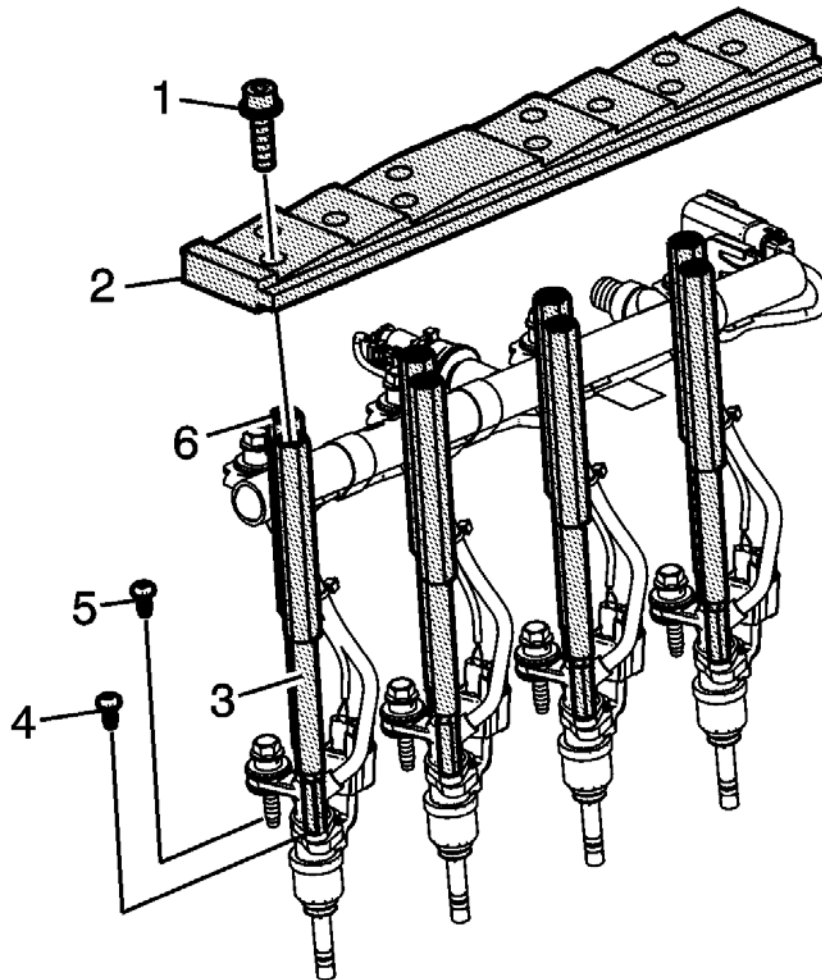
Installing Fuel Rail Assembly Using Special Tools
